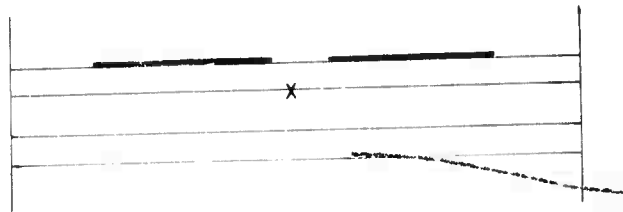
CRACK PROGRESS IN CAST TEE BUTT WELDED TO ROLLED PLATE
